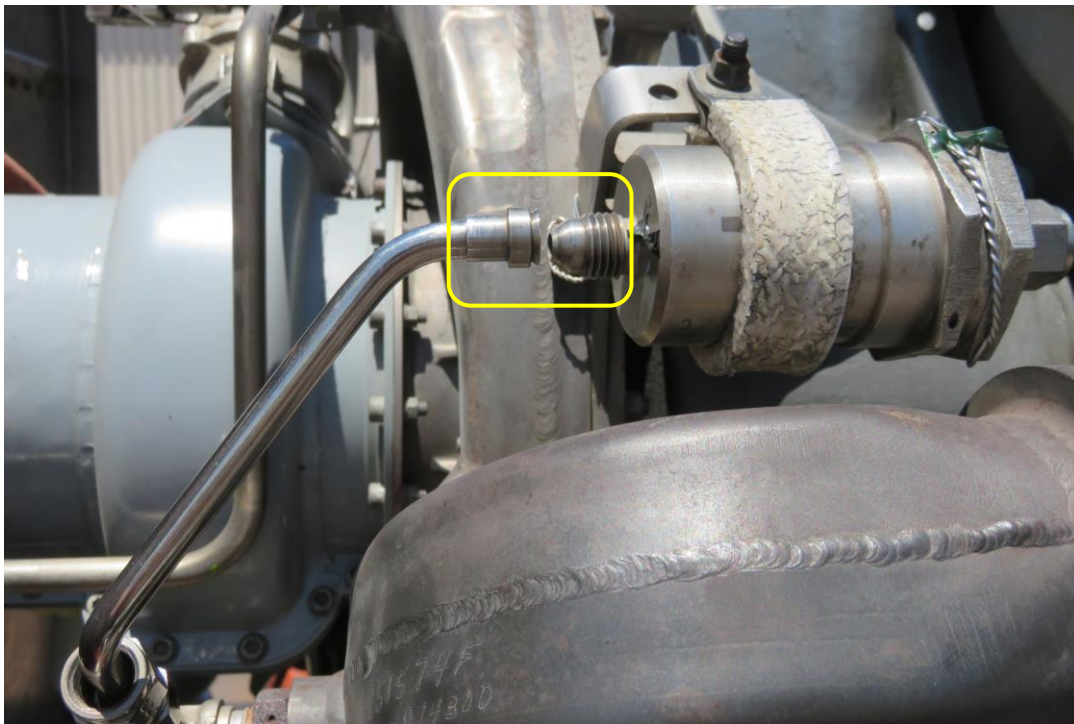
The new Pc tube connected to the long end of the compressor scroll.
